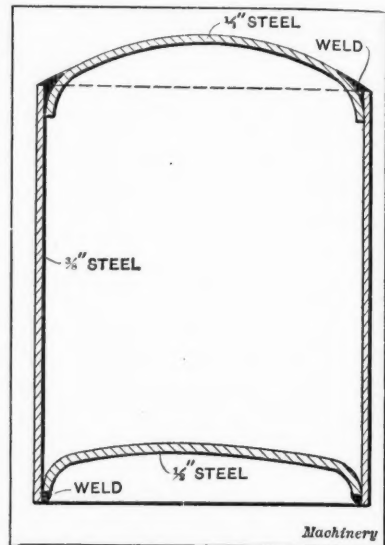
Example of Tank welded by the Oxy-acetylene Process
